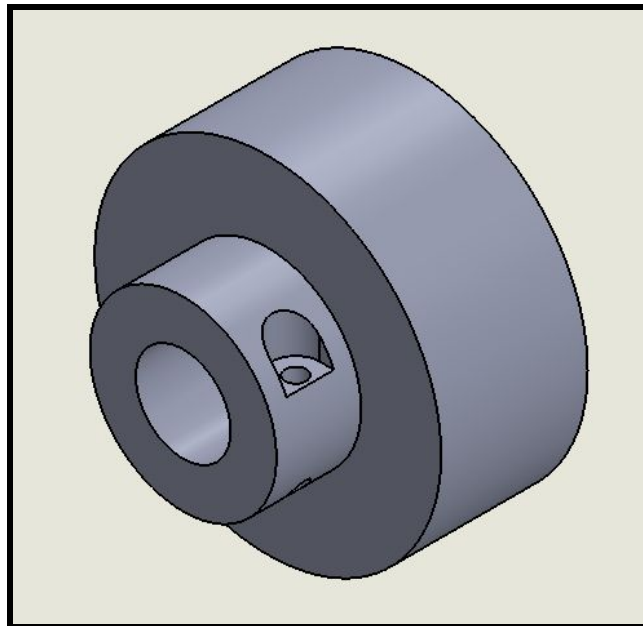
Isometric Solidworks model of the torsional motor pulley
